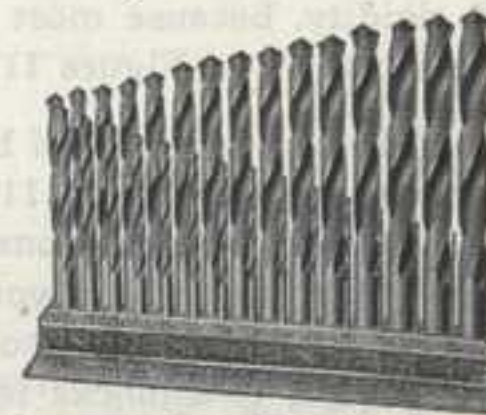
Drill set including metal carrying case and stand for 29 drills.
